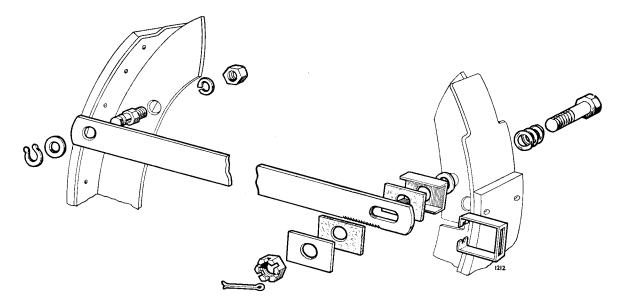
Adjuster bar arrangement (right-hand brake illustrated).
